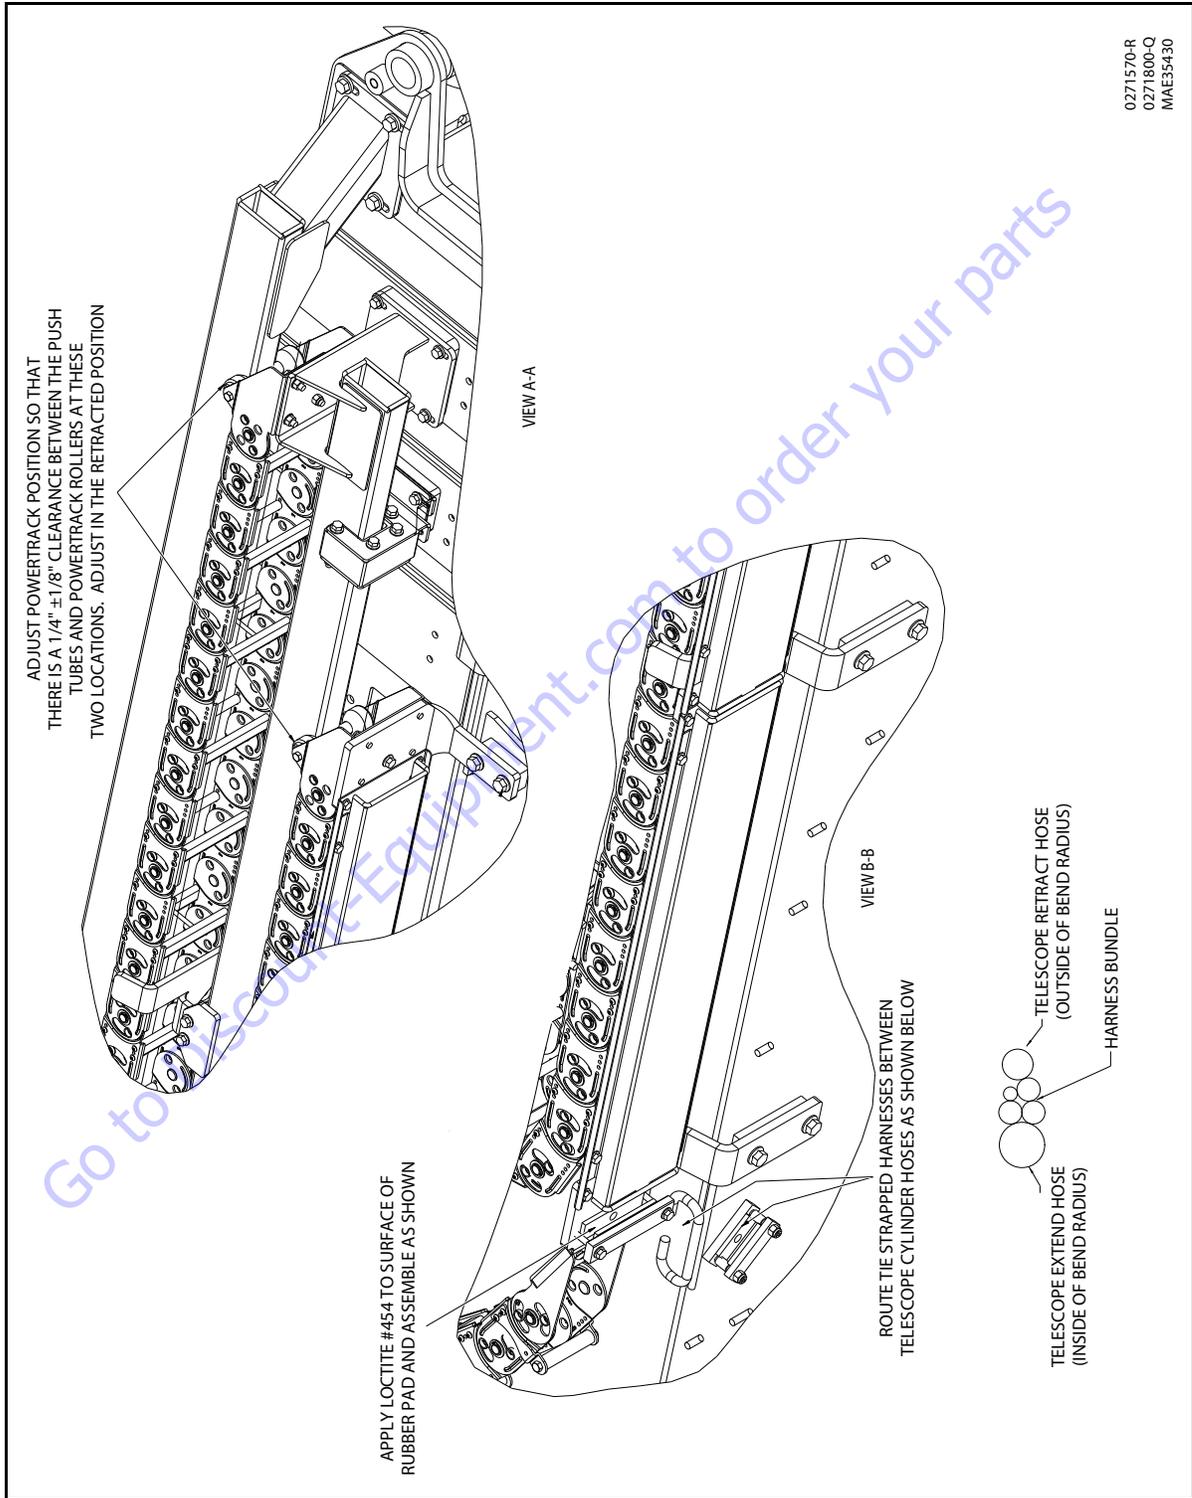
Powertrack Installation - Sheet 4 of 6
